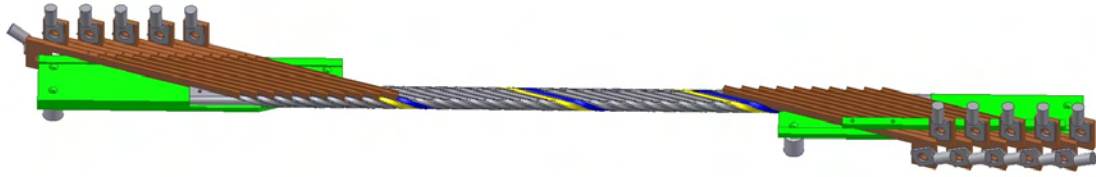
CAD drawing of the subsize CCRC demonstrator cable [3]
